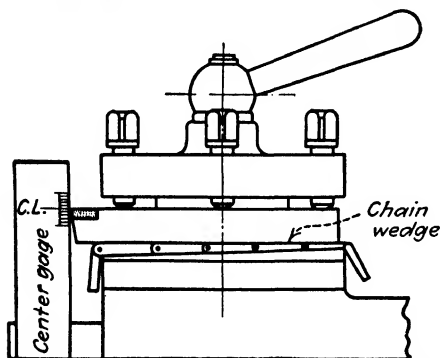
A suggested method of adjusting tool for height and a simple center gage.
